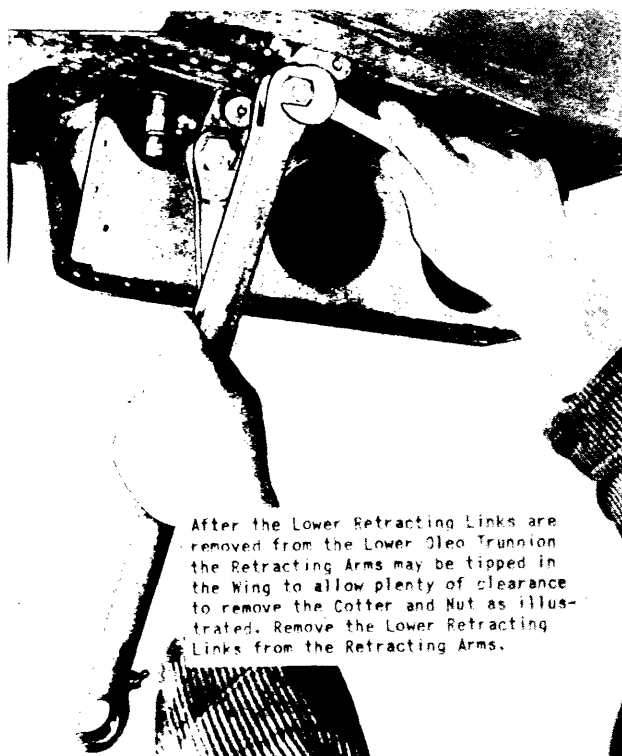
Disconnecting Lower Retracting Link from Retracting Arm
